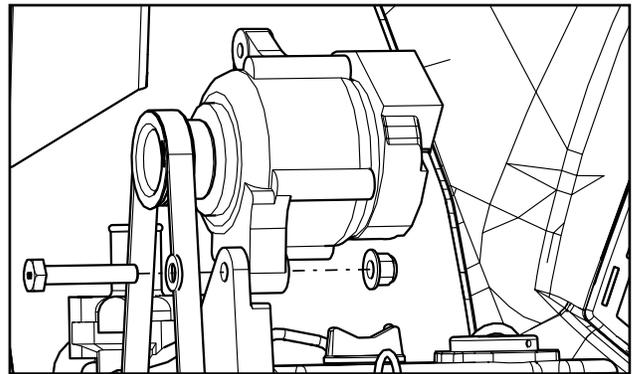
(Auxiliary Alternator Lower Hardware)
